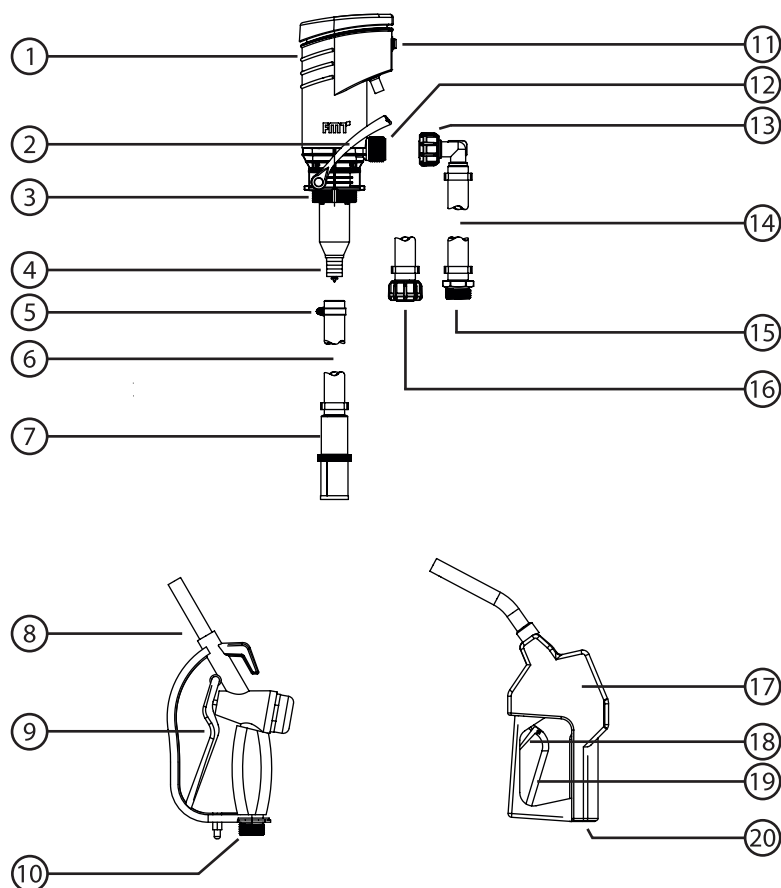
Overview of PREMAxx DEF axial gear pump with accessories
